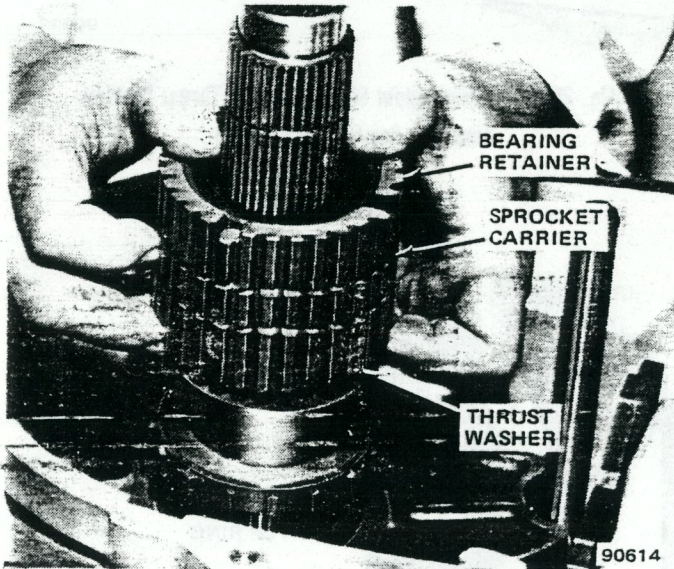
D-19 Sprocket Carrier, Bearing Retainers, Thrust Washer and Needle Bearing Removal
